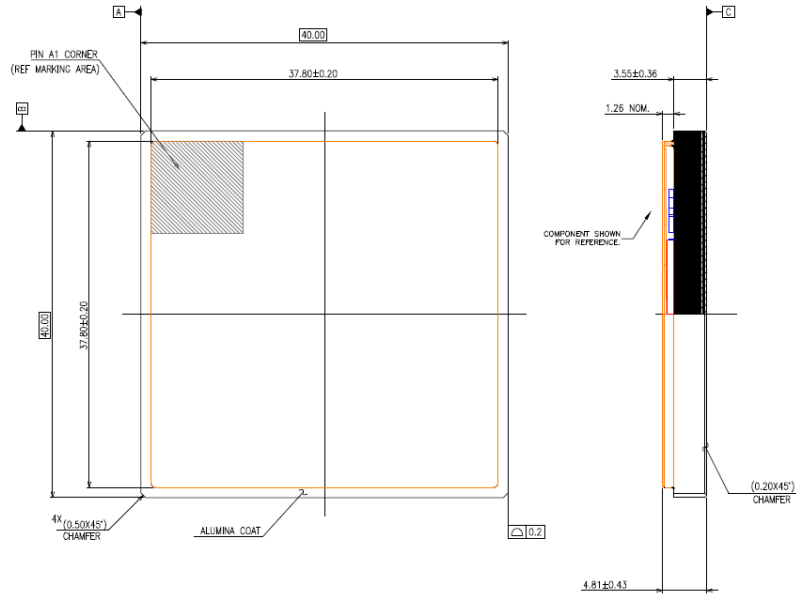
RTPFS460ZT-LG1509 Package Bottom-View
